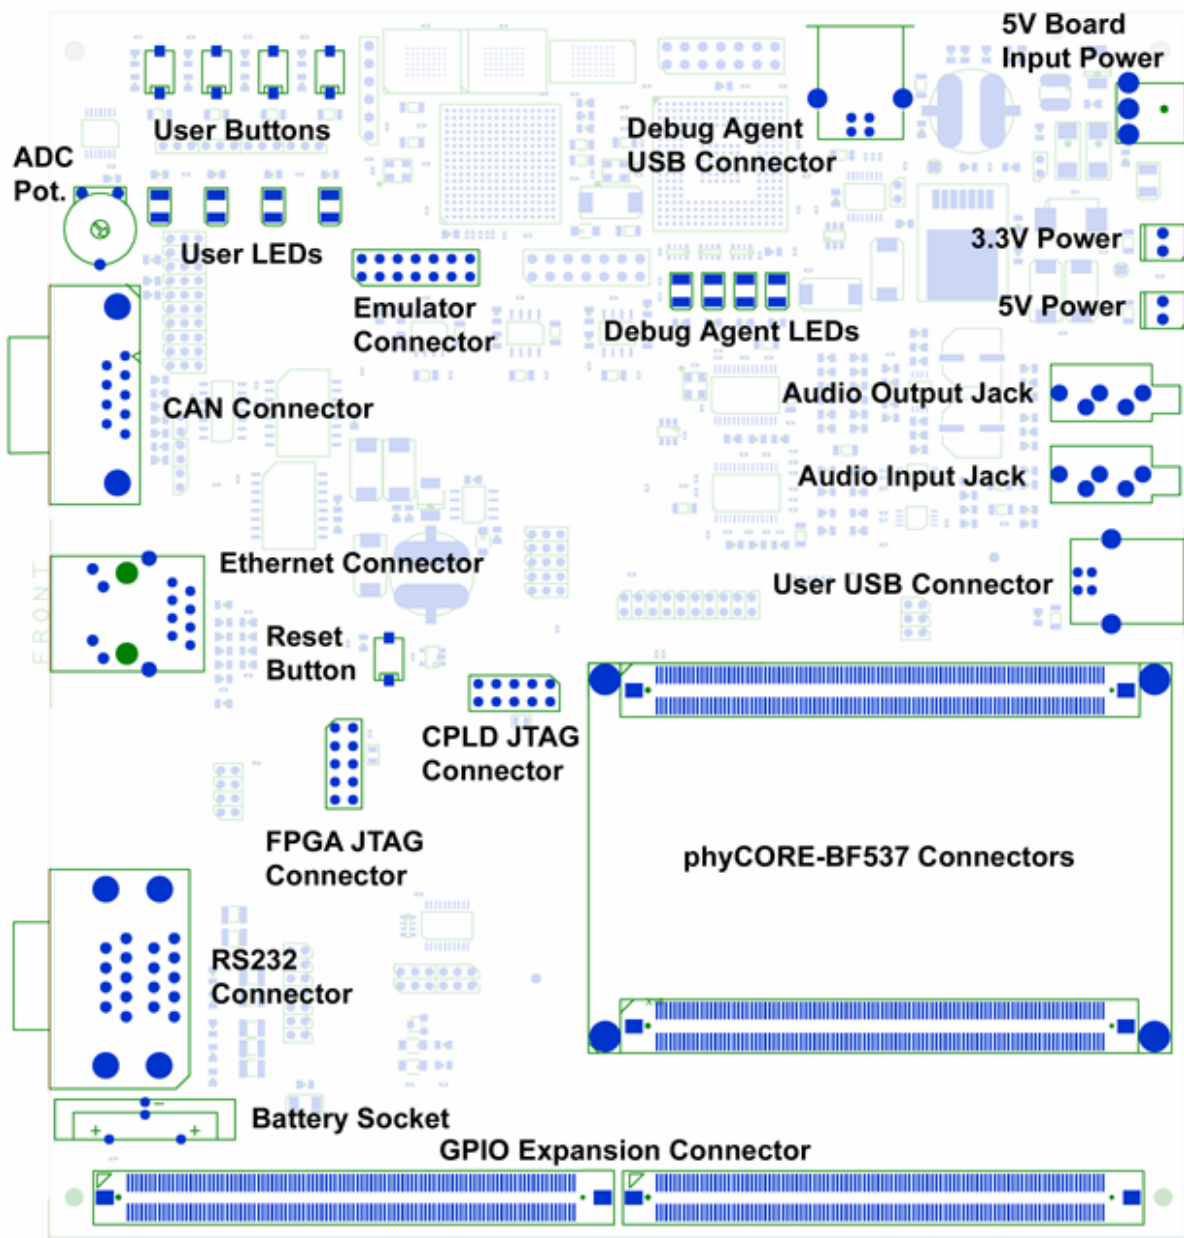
Component Locations on the phyCORE-BF536 Carrier Board
